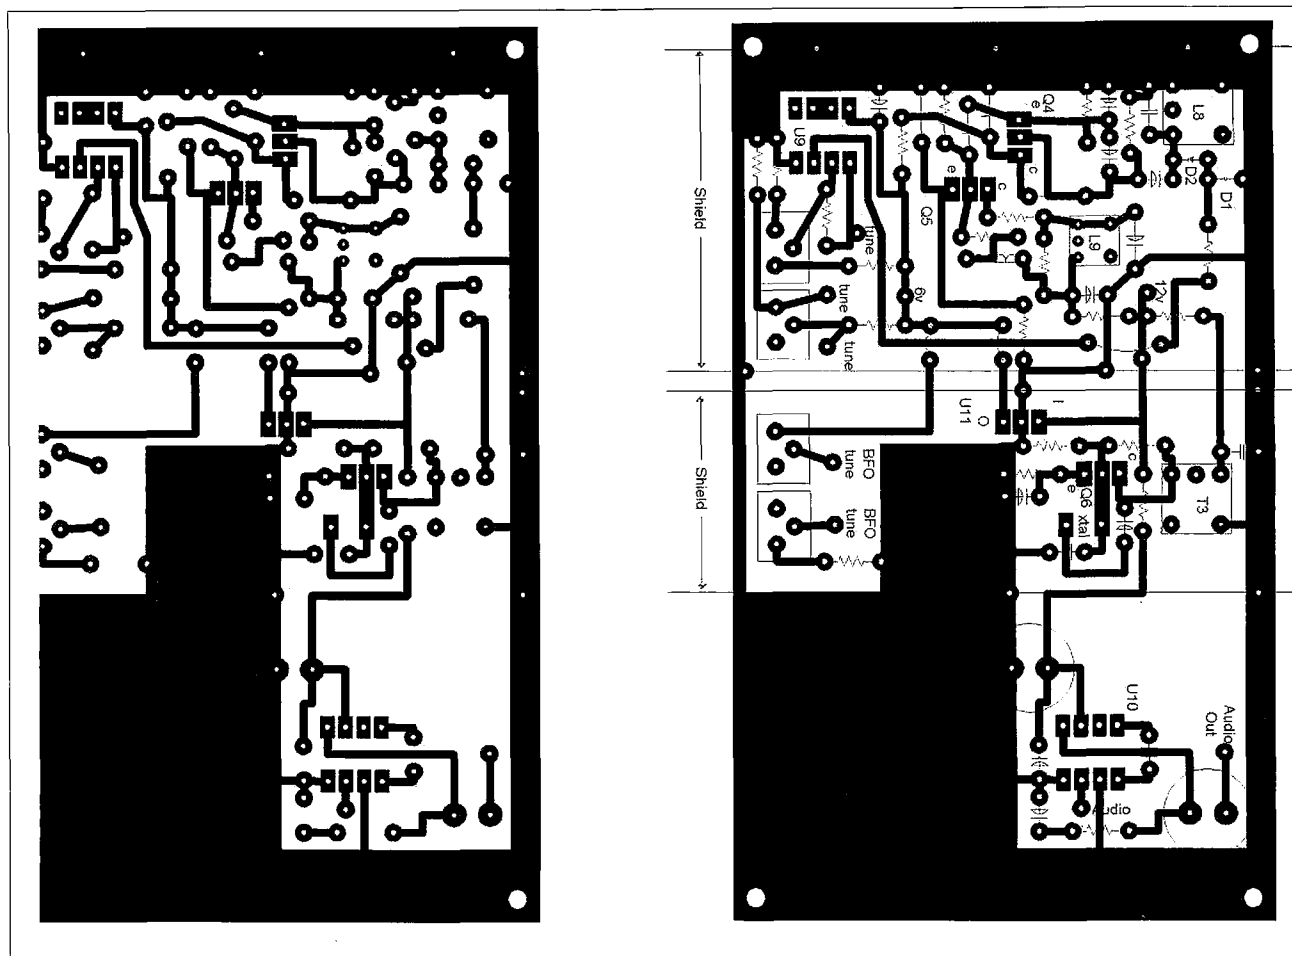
(a) Oscillator board. (b) Parts layout from foil side.
